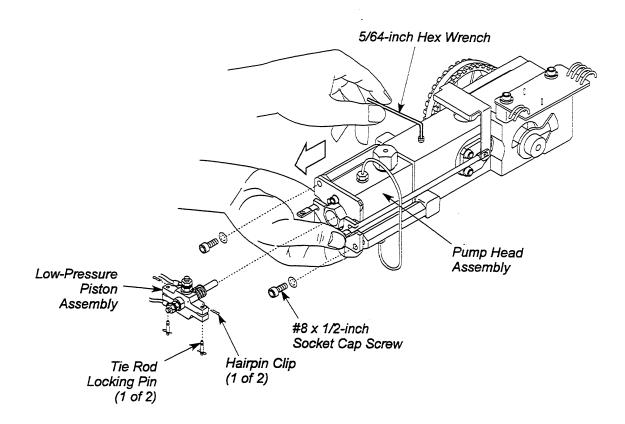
Loosening the Setscrew and Removing the Pump Head Assembly.
